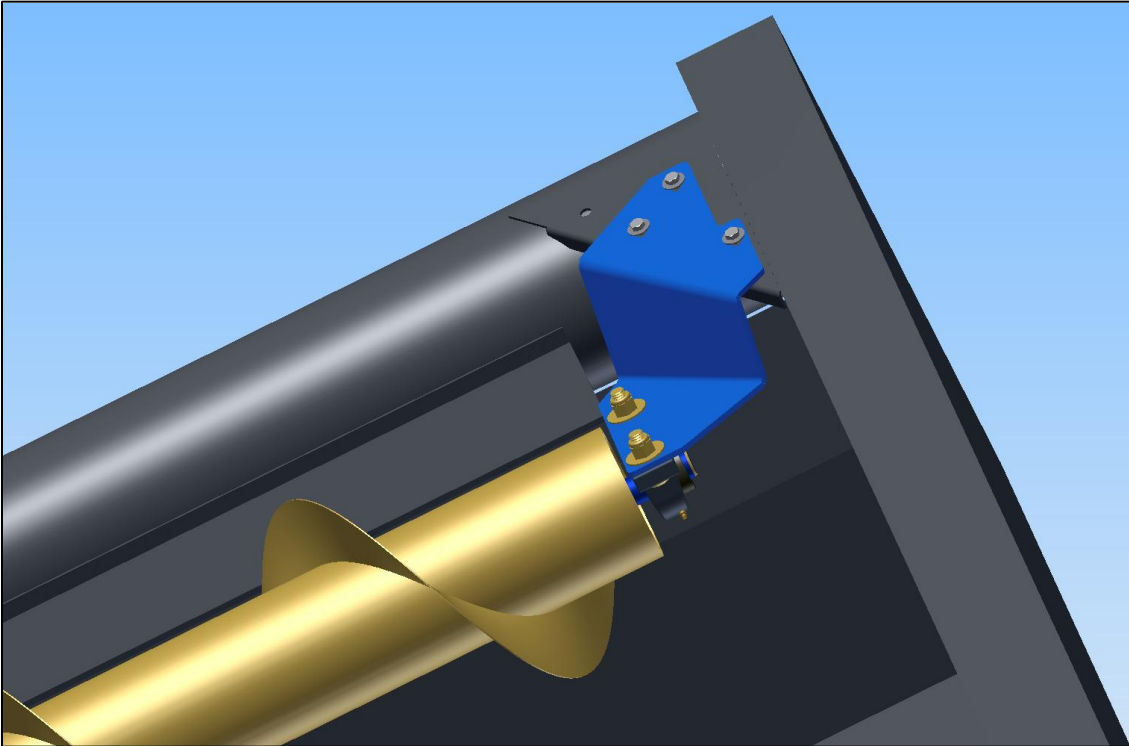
LEFT END MOUNT (ISOMETRIC VIEW)
